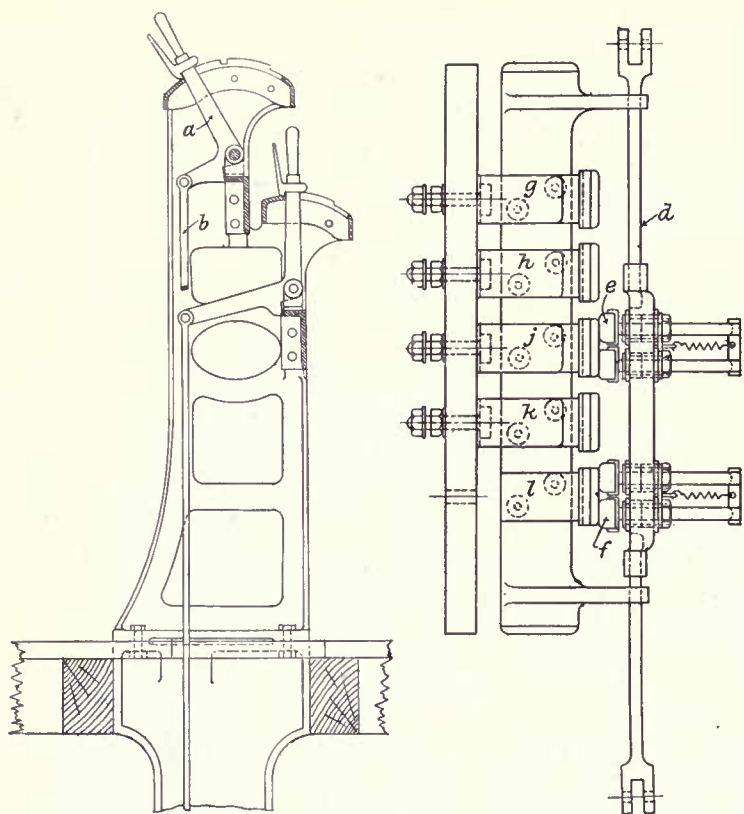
Locking Frame, "Crewe" System. Fig. 471. Detail of the locking frame mechanism.
